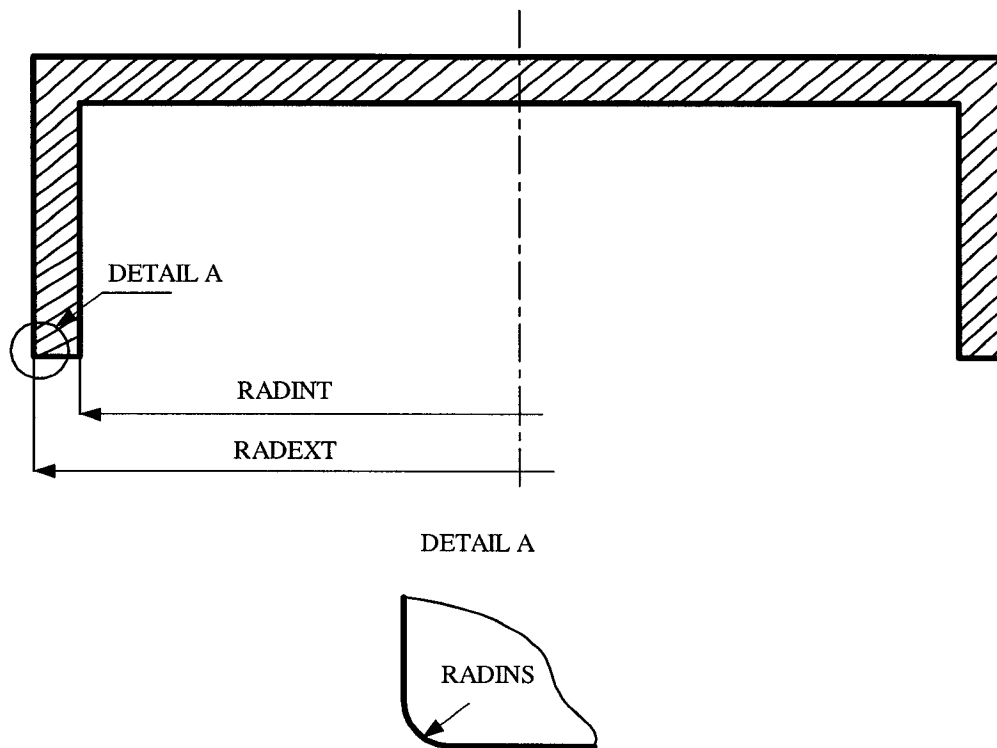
The cup mill cutter dimensions input in the developed program (RADINT – tool inner radius; RADEXT - tool outer radius; RADINS – insert radius)
